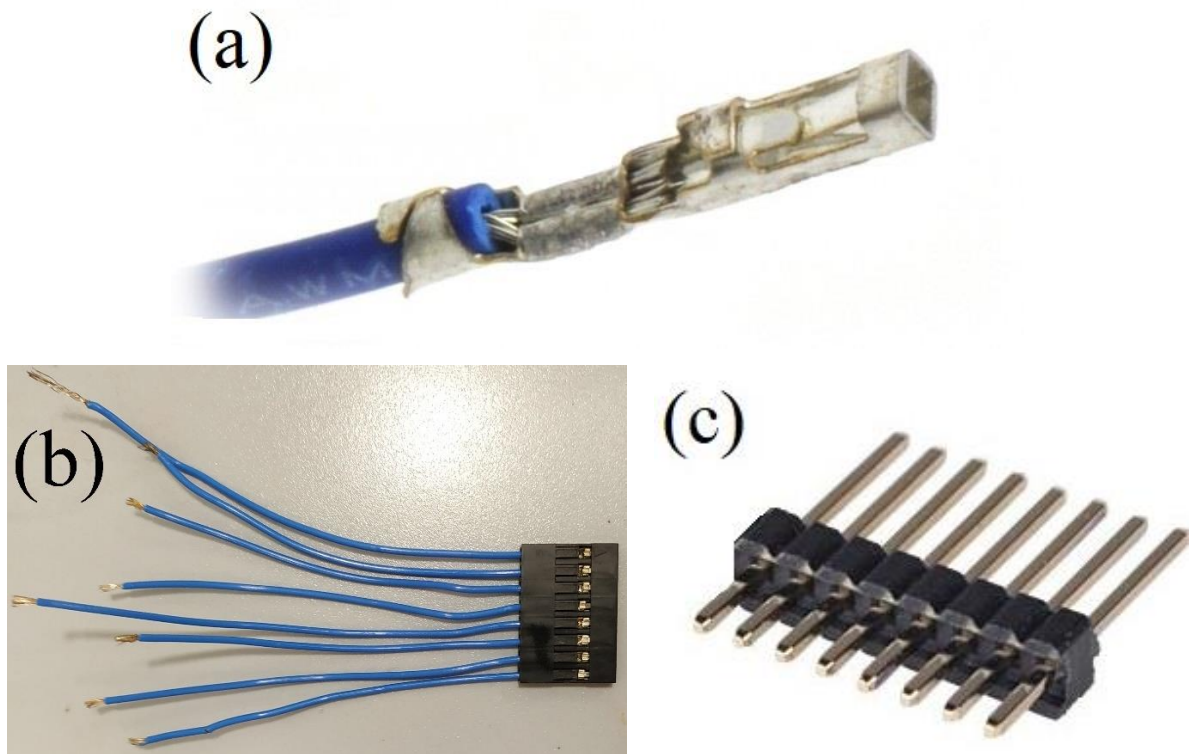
Supporting components of the PCB. (a) Female crimp pin (right) that has been attached to a wire (left). (b) Female housing connectors with the crimped wires attached to them. (c) Pin headers. The short side is welded to the PCB, while the long side is connected to the female housing connectors.
